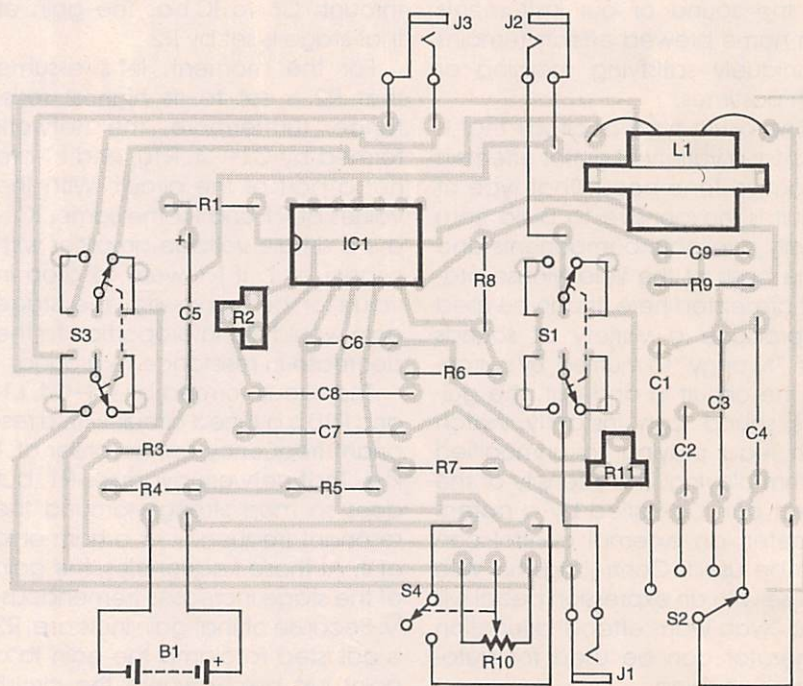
The Wild Mouse is simple enough to be laid out on a single-sided board without the need for jumpers.
